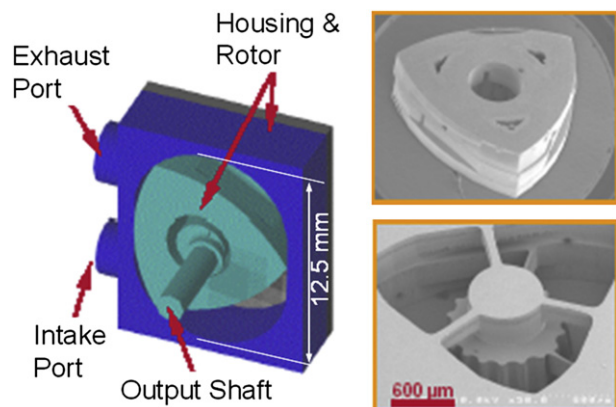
The UCB mesoscale rotary engine (left) and micro-rotary engine (right) [2].
